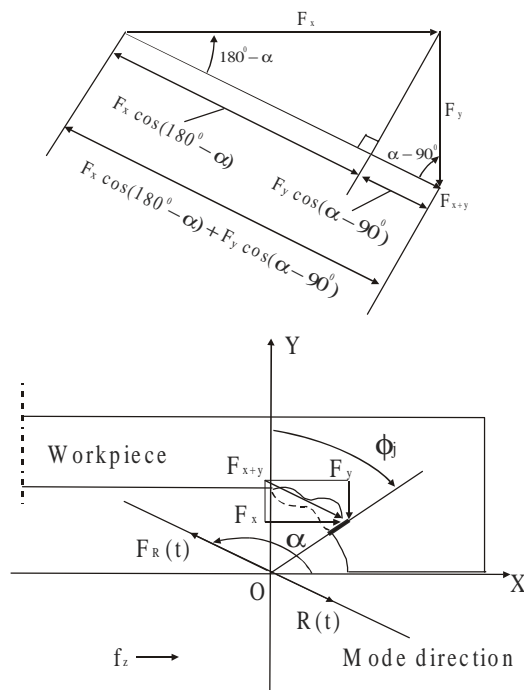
The schematic presentation of the vibration of tool/tool-holder/spindle assembly in milling for a single-degree-of-freedom system
